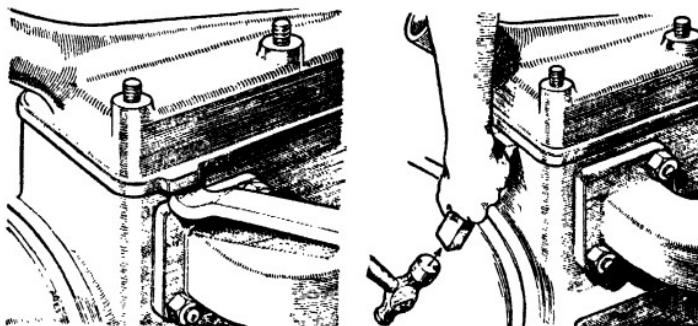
METHOD OF REMOVING CYLINDER HEAD.
